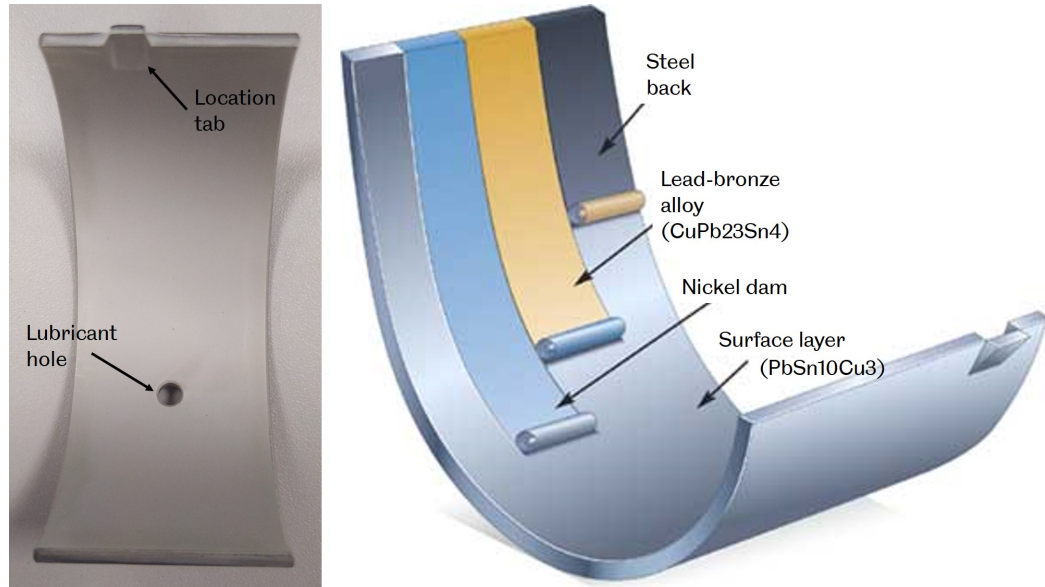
TD60 bearing shell. Diameter of 63.5mm and a length of 34mm. Part number: 77 138 600. Computer generated image was adapted from Machinery Lubrication magazine [75].
